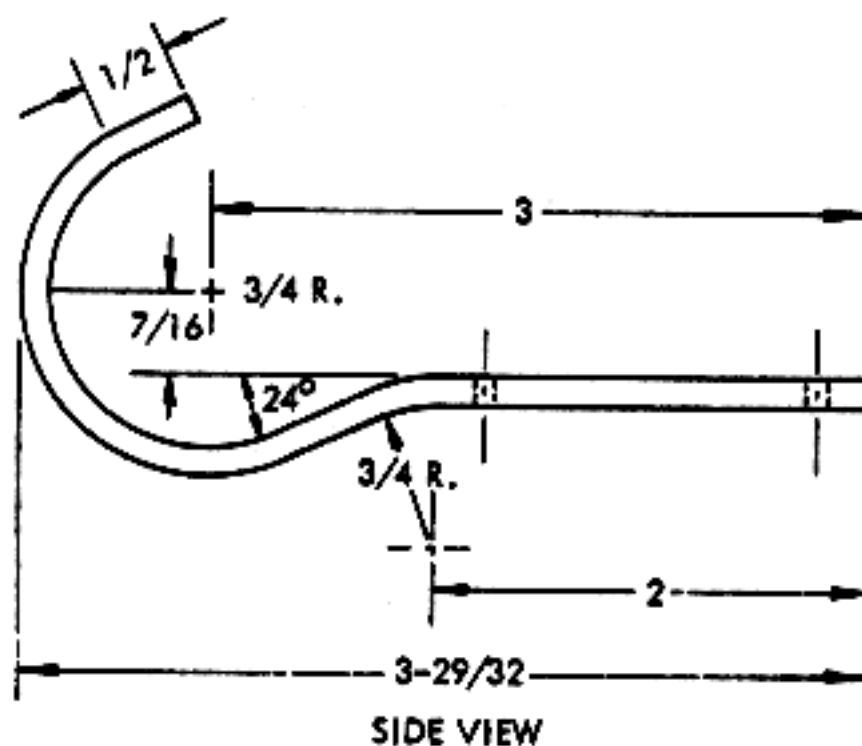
Improvised barrel facing and flash suppressor muzzle seat tool.
